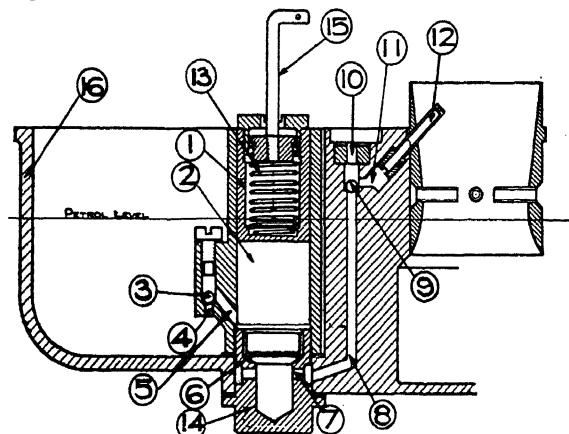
Illustrating principle of the Amal Pump Carburettor.
